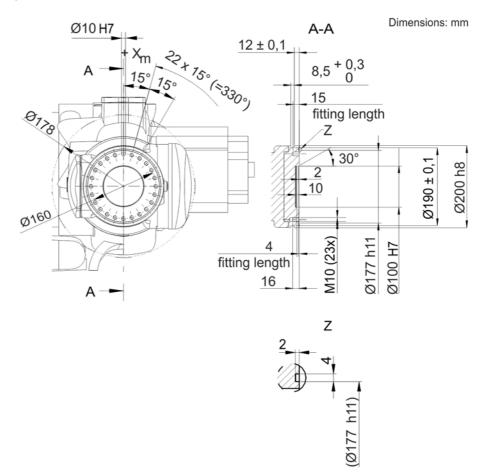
Mounting flange D=160 for F-HP in-line wrist
